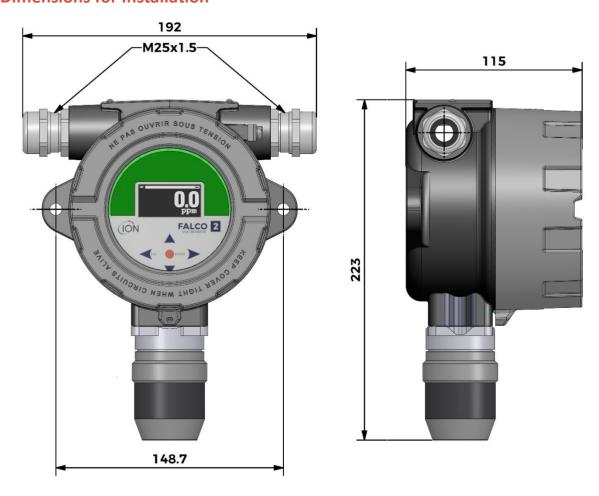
Dimensional drawing of the FALCO 2 11.7, showing front and side views with key measurements and mounting details
